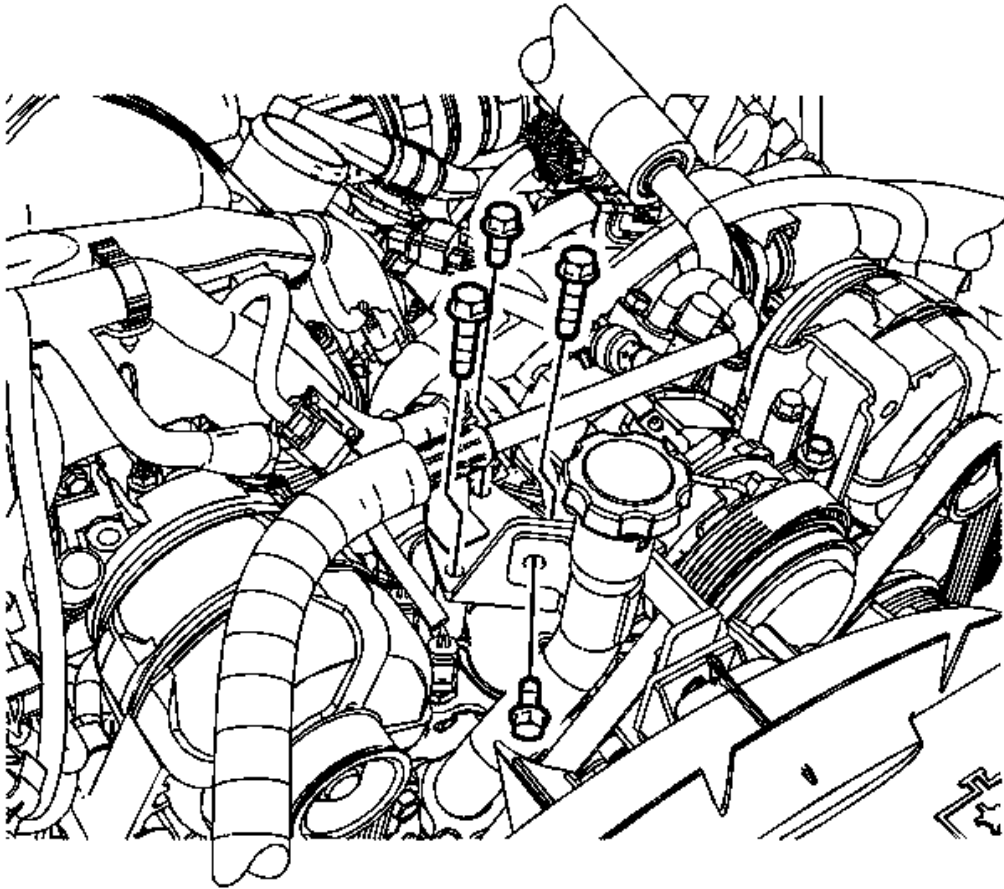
View Of EGR Cooler Pipe Clamp
